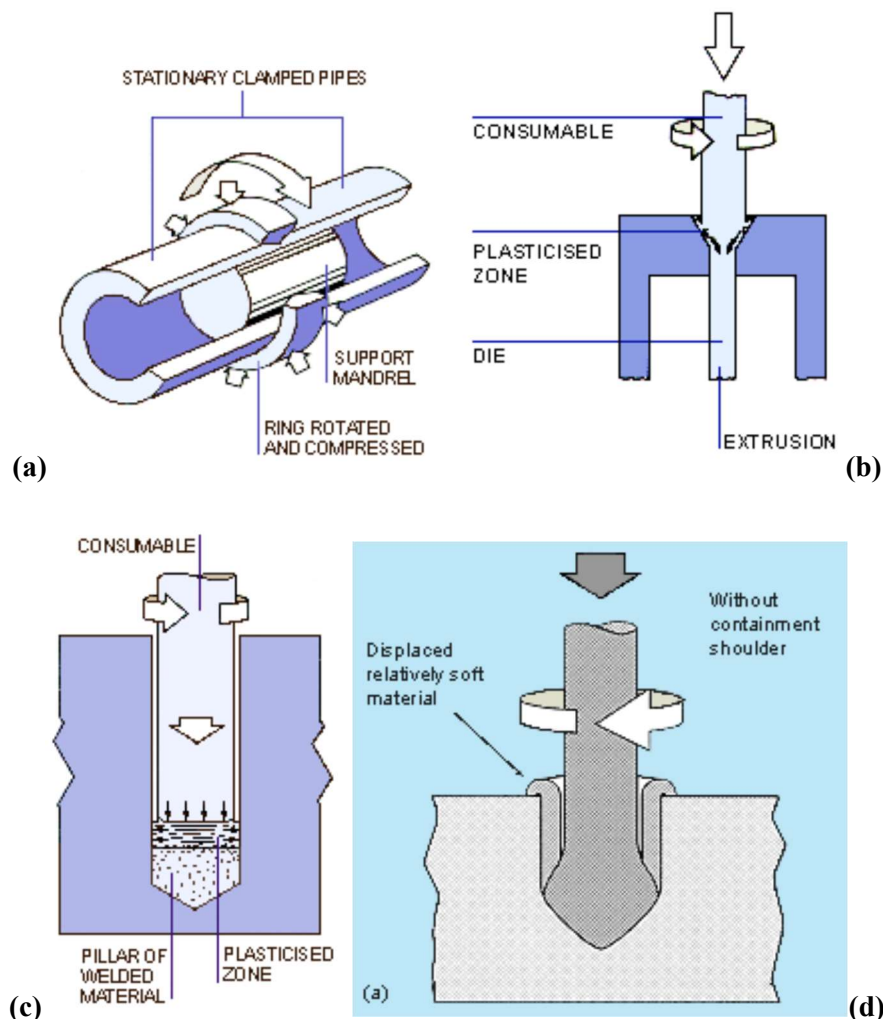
Schematic of a) radial friction welding, b) friction extrusion, c) friction hydro pillar processing d) friction plunge welding without containment shoulder [1]
